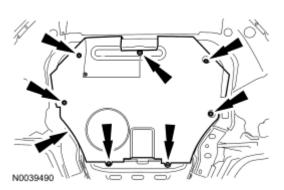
Locating Splash Shield Bolts Courtesy of FORD MOTOR CO.
